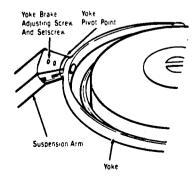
YOKE BRAKE ADJUSTMENT.
